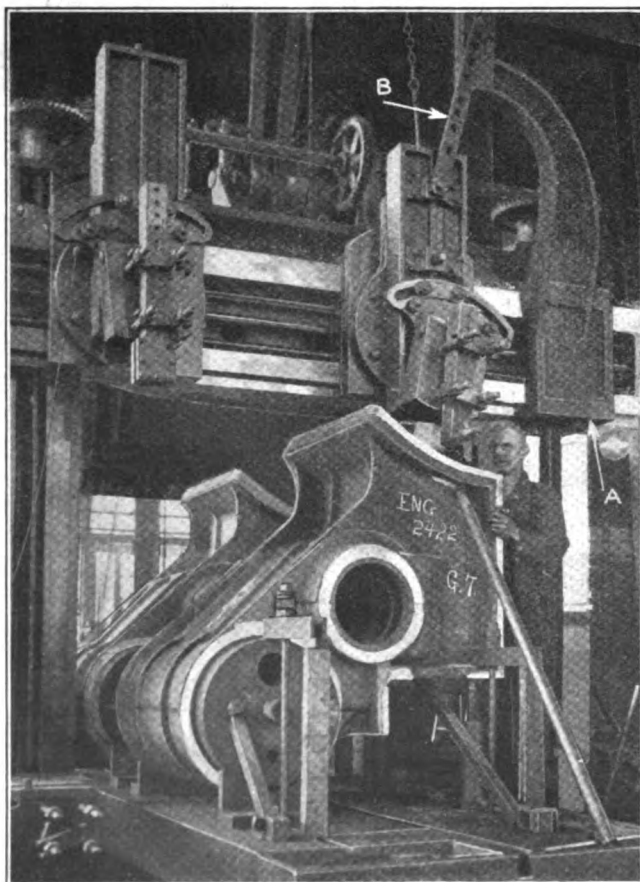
PLANING RADIUS ON CYLINDER CASTINGS
